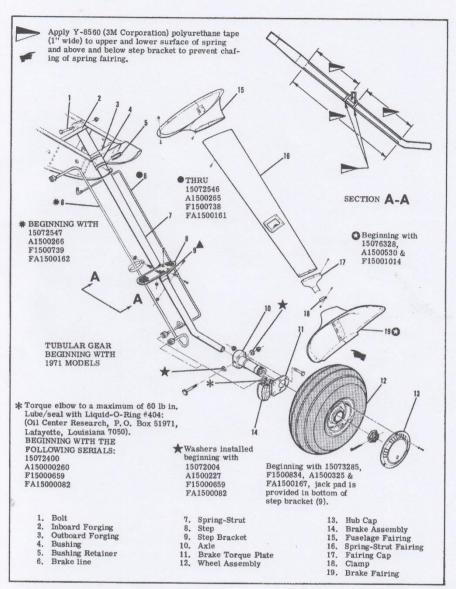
Main Landing Gear (Sheet 2 of 2)
